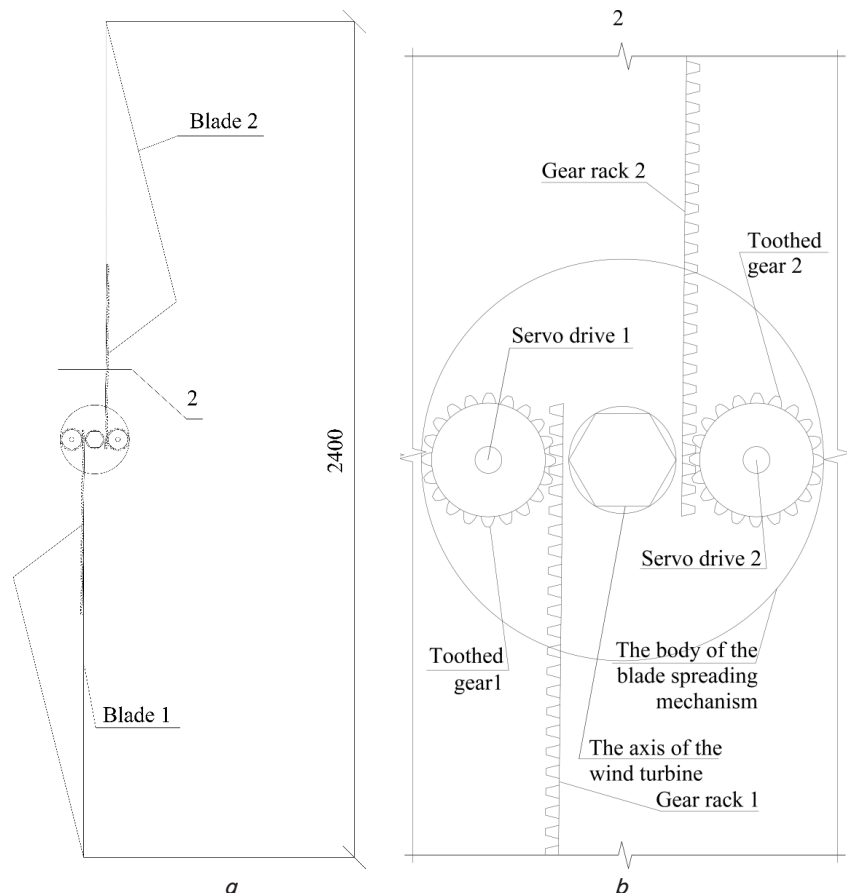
A wind turbine with a blade extension mechanism, the blades in the extended state: a – a general view of the wind turbine; b – a close-up of the blade extension mechanism
